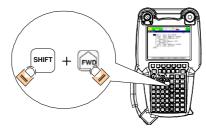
(c) Continuous Operation of Weld Program
